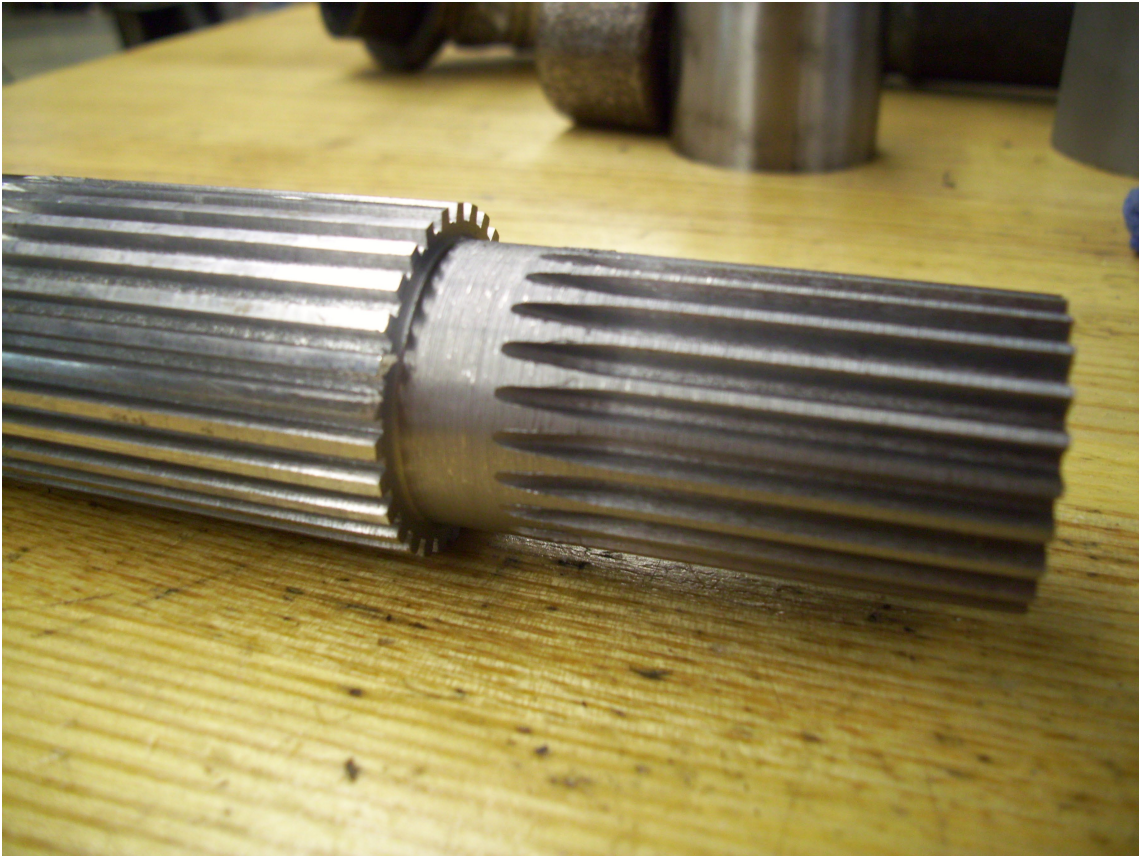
The final output shaft contains both gear spline and CVJ spline profiles.
